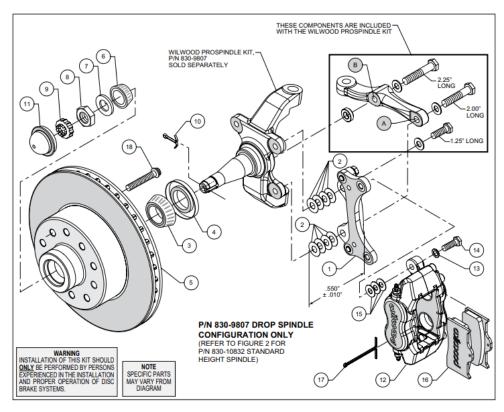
Hub and Brake Assembly Shown as Mounted on Spindle.
